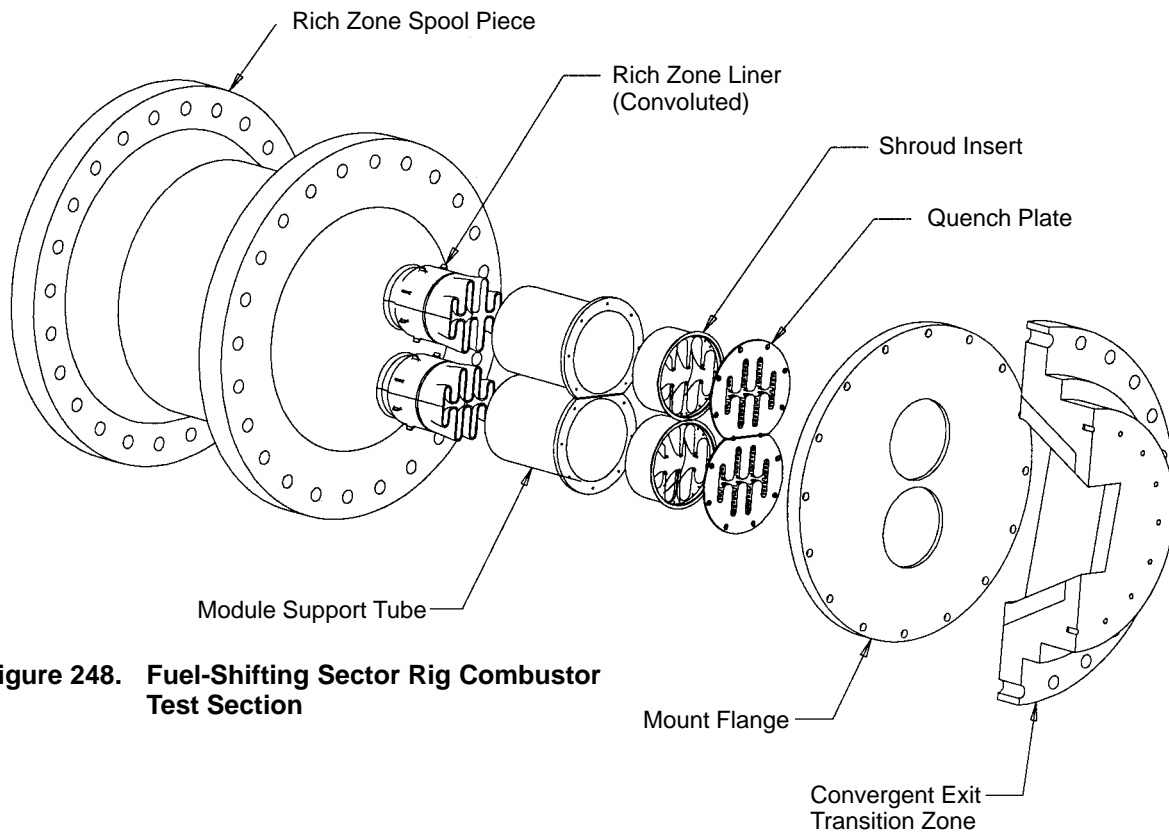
Fuel-Shifting Sector Rig Combustor Test Section
